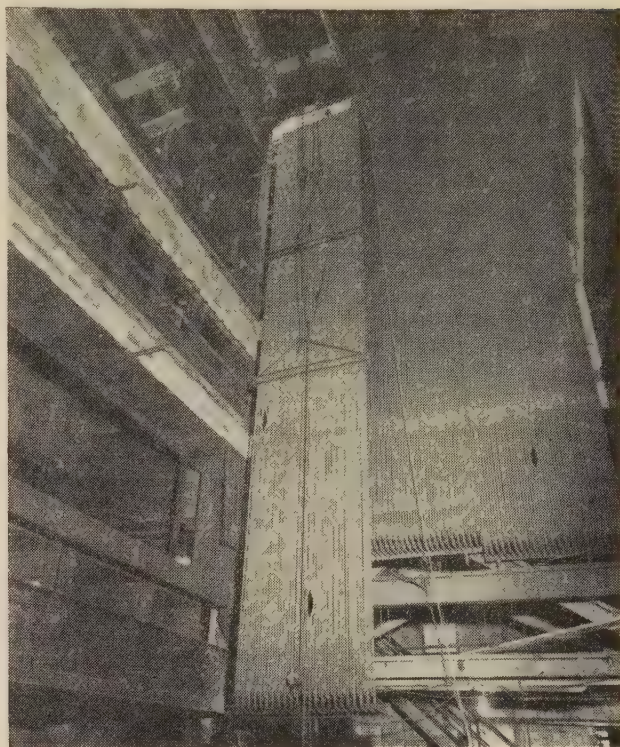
15,000-Kw MERCURY FURNACE SIDE-WALL ASSEMBLY
